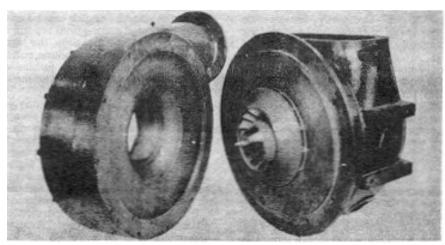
Partially Dismantled View Showing Blower End Sub-Assembly with Vaneless Diffuser and Turbine and Intermediate Casing Assembled with Rotor.
